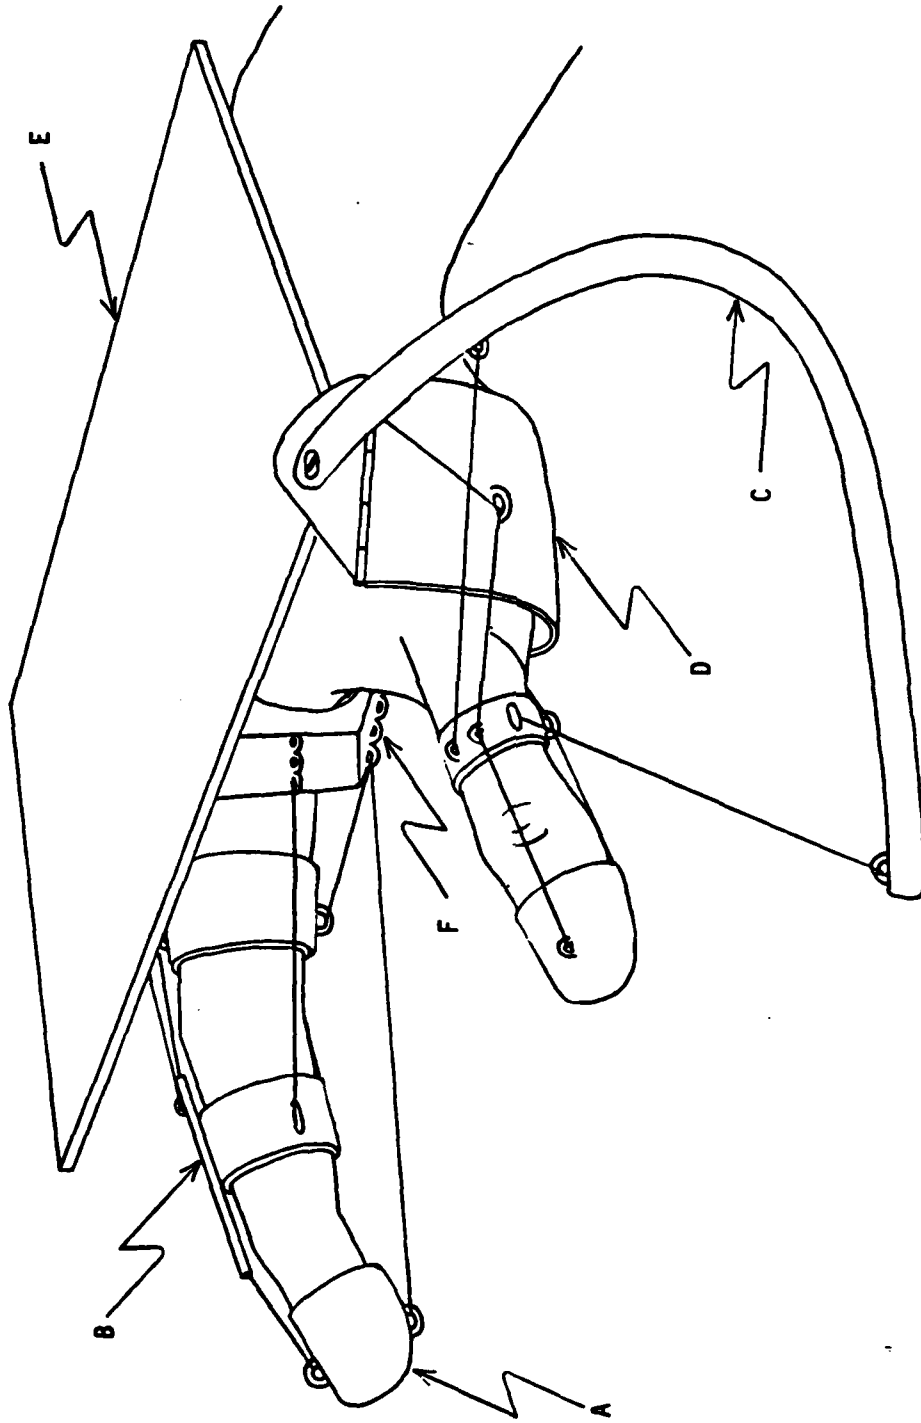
MASTER HAND CONTROLLER (SIDE VIEW)
